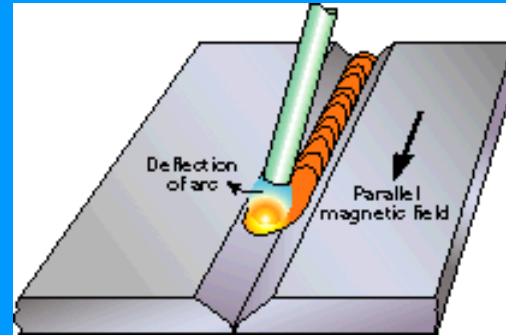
Weld bead deflection in DC MMA welding caused by welding past the current return connection
